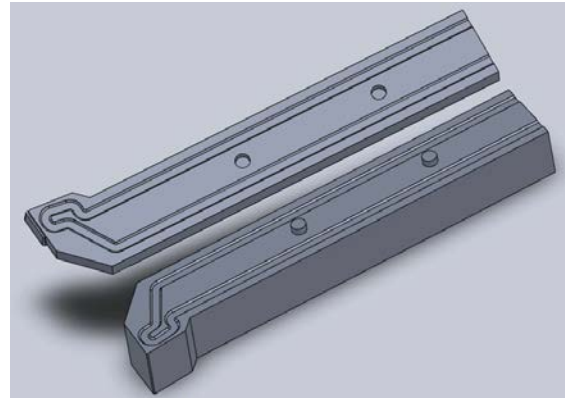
Tool holder of an internally cooled tool in exploded view.
